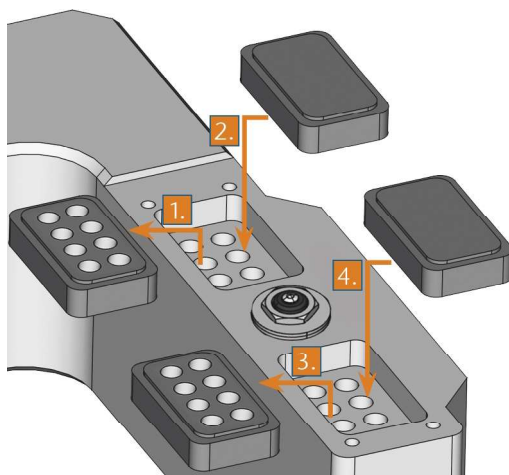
NEW TOOL MAGAZINE INSERTS (RIGHT, WITHOUT TOOL POSITIONS) REPLACE OLD INSERTS (LEFT, WITH TOOL POSITIONS)
